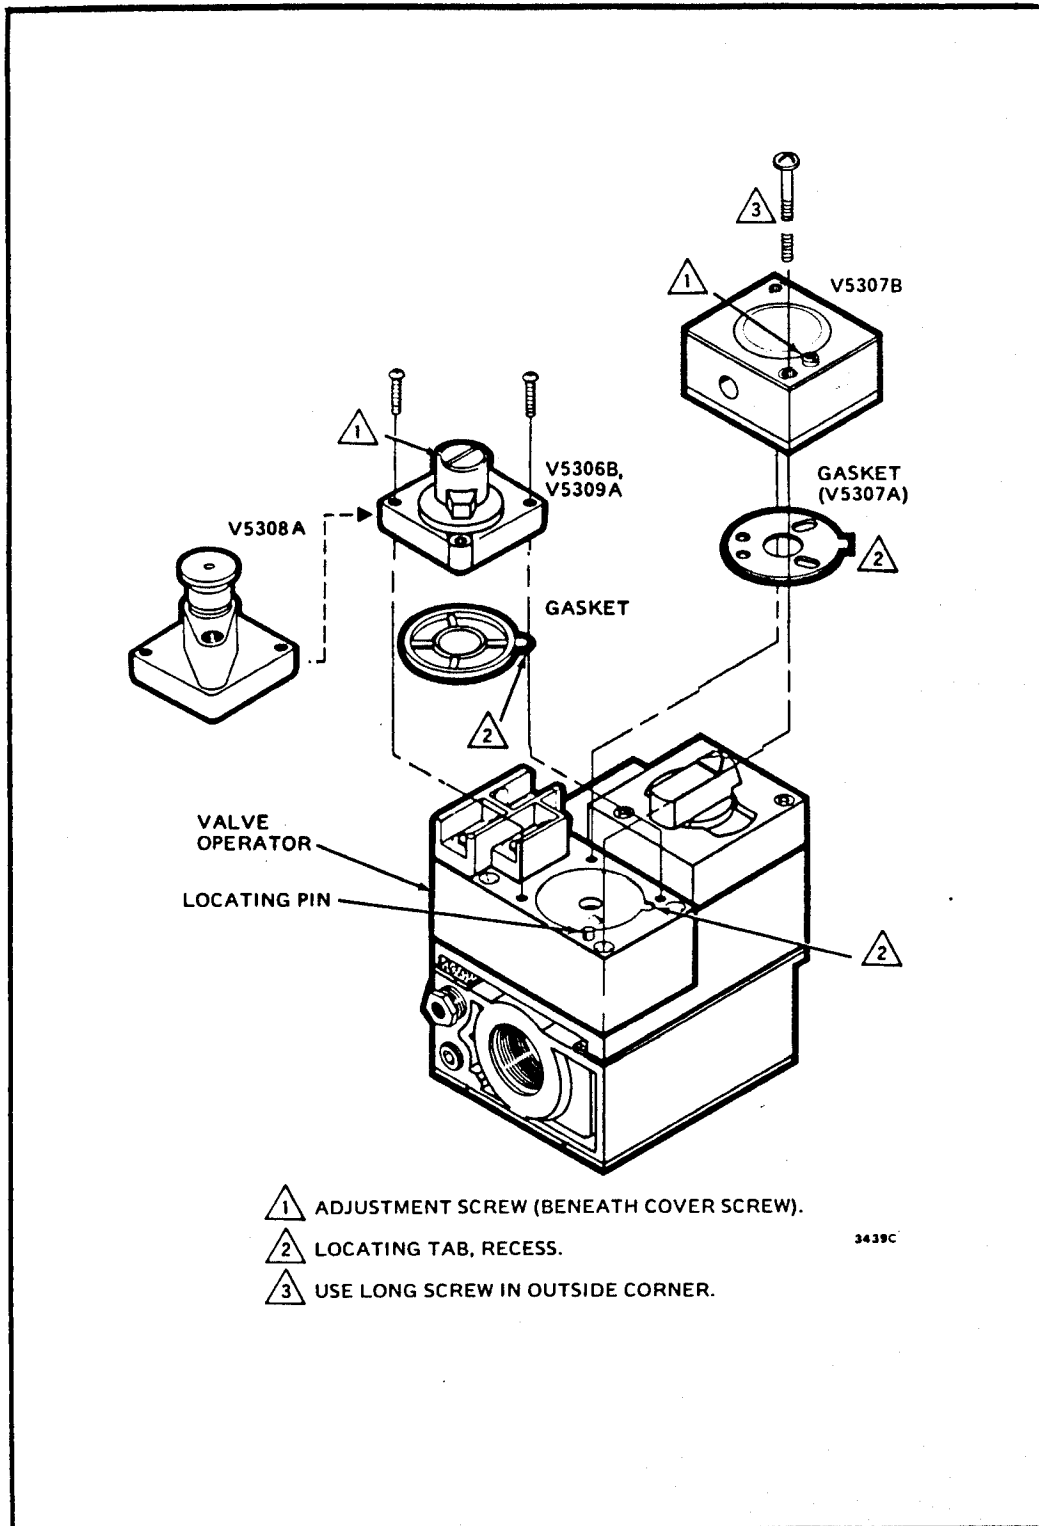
Installing regulators on combination gas controls with valve operators. (V800 shown.)
